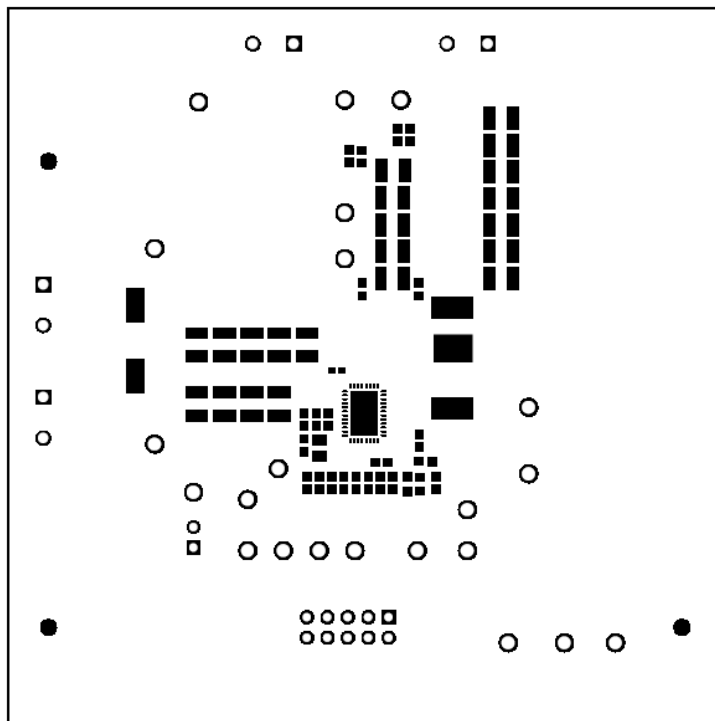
PWR-784EVM Top Solder Mask (Top View)
